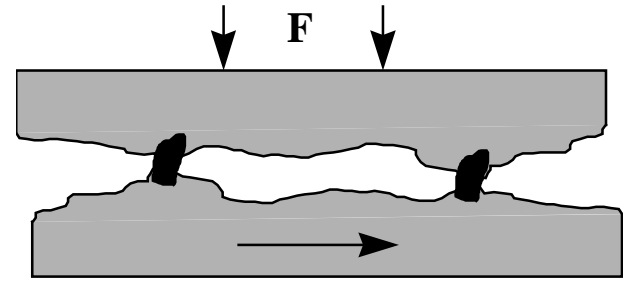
As the lower surface moves the asperities cold weld together.
